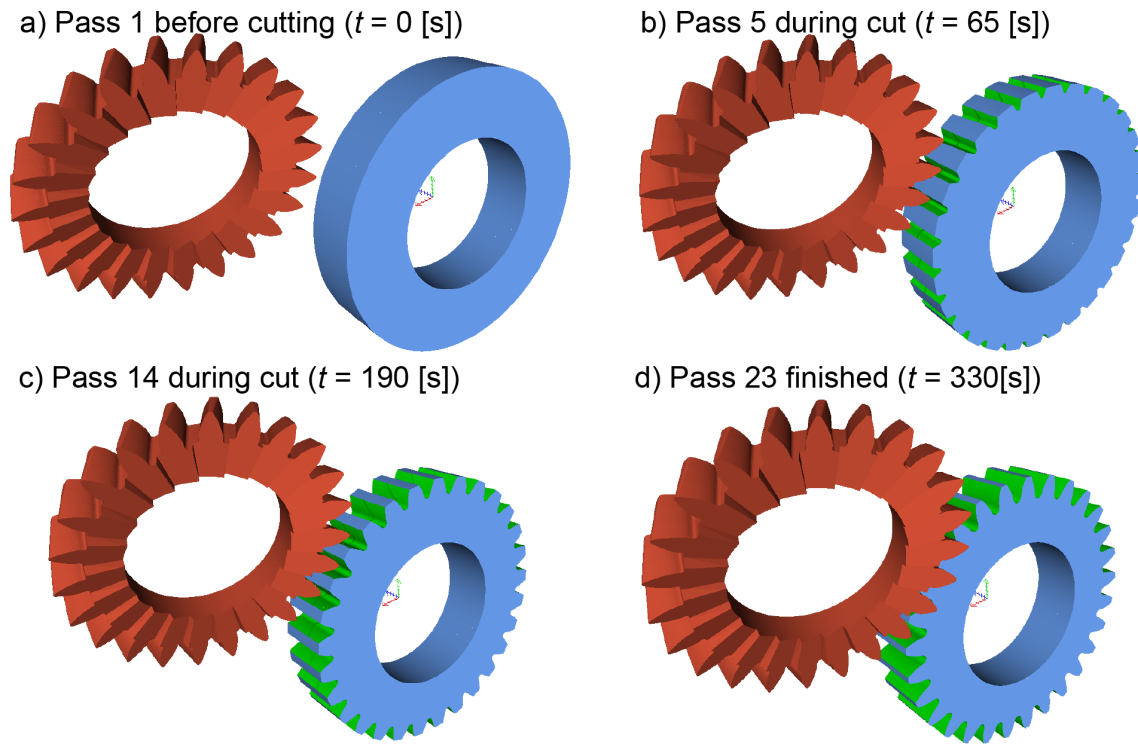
Representation of tool and workpiece in the ModuleWorks engine.
